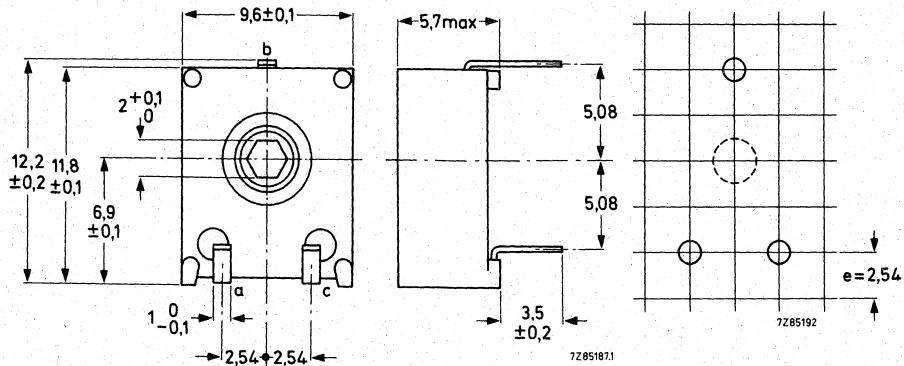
Horizontal mounting, version with hexagonal recess (insulated cold wiper, b).
